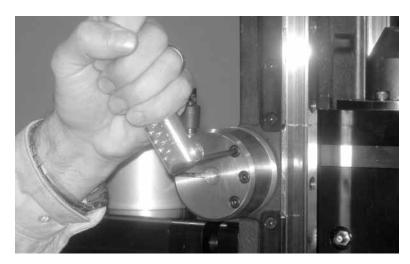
Remove the 3 screws from the feed lock clamp.
